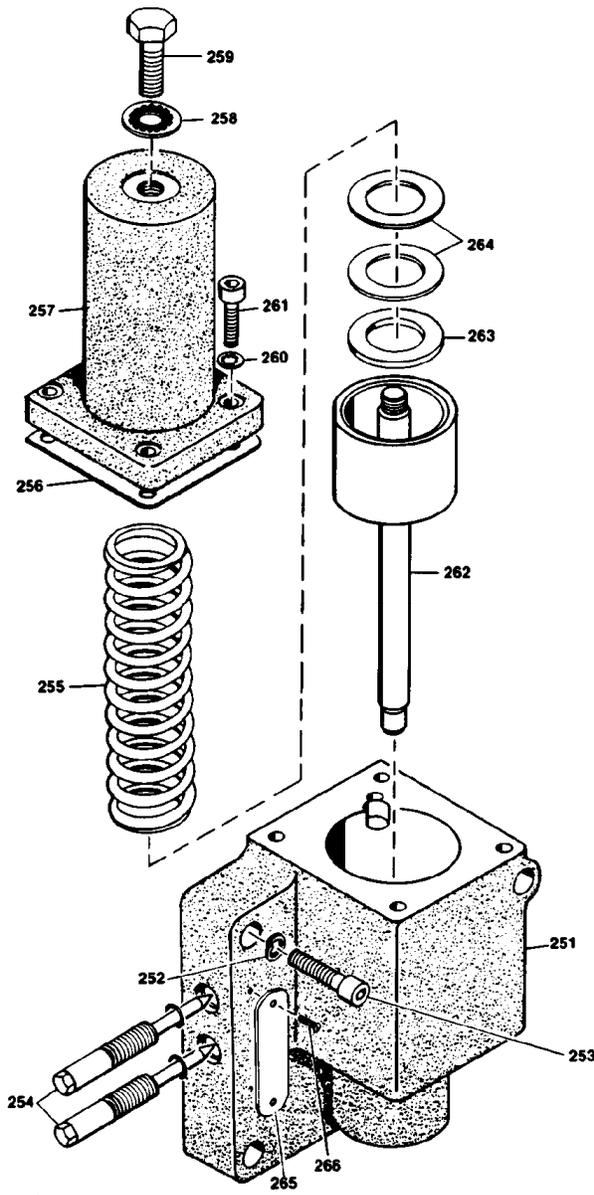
Exploded View of the Power Cylinder for a PG-PL Governor
